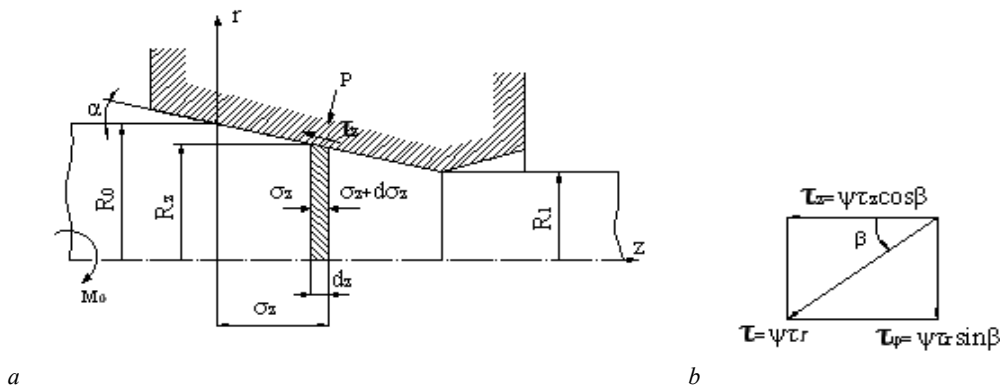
Scheme to determine the pressing pressure of a workpiece with torsion:
